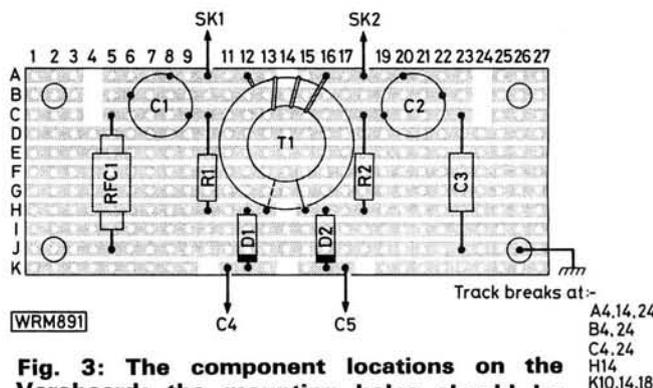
The component locations on the Veroboard; the mounting holes should be drilled very carefully to avoid damaging the board
